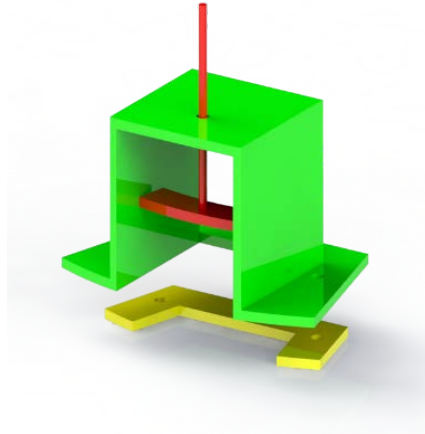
Rendering model of the Rim Seal Mounted Clamping Tool.
